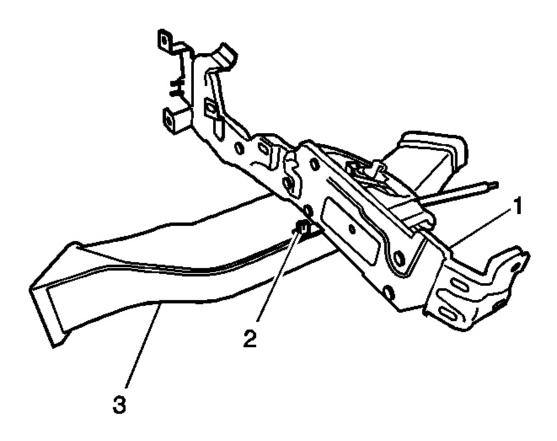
Removing/Installing Push Pin Courtesy of GENERAL MOTORS CORP.
